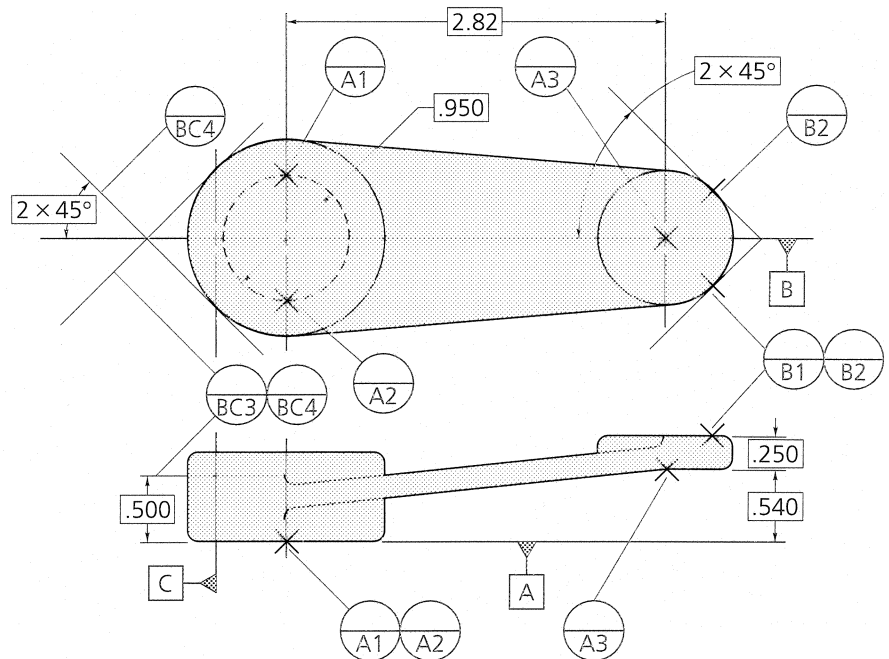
Datum Targets Showing "Step" and "Equalizing Dimensions"
